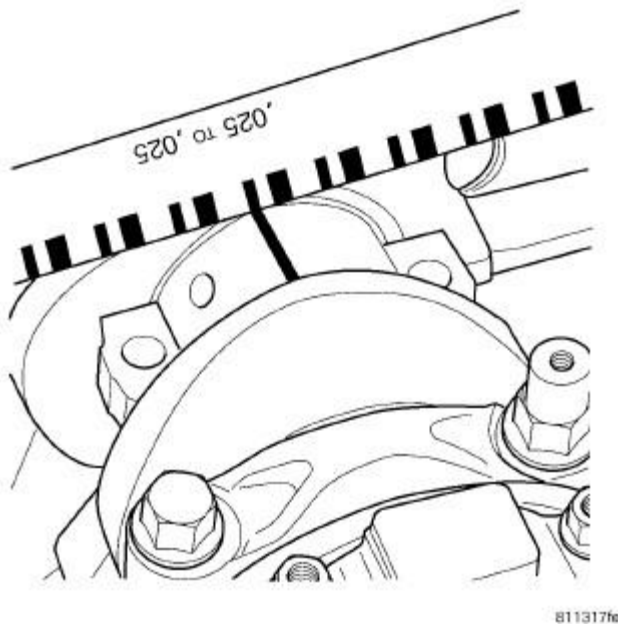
CONNECTING ROD BEARING CLEARANCE
